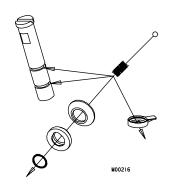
Clean O-ring grooves, seal and nozzle with brush.
